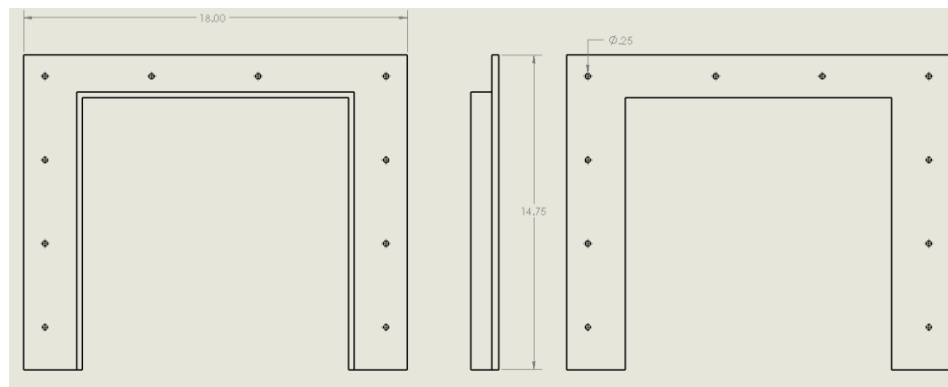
Orthographic projection views of the Blower/ Louvre and Test section side flanges marked with basic dimensions.
